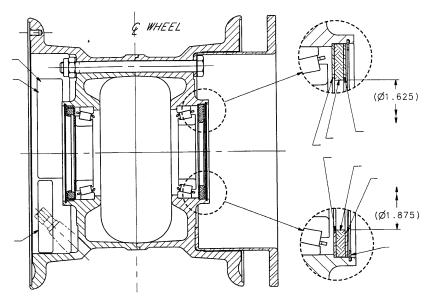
Converting 40-97E Wheel Assembly to 40-97F Configuration
